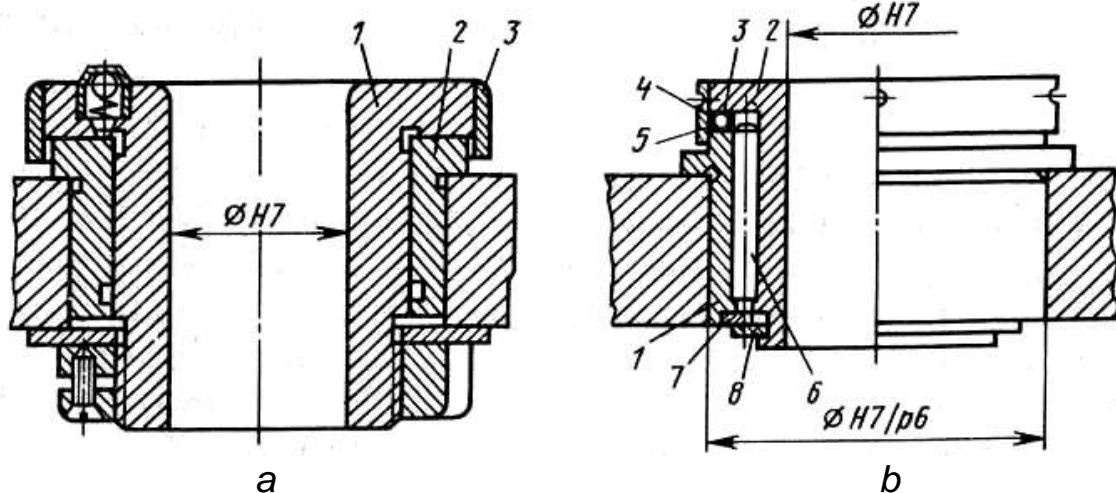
Guide rotating bushings mounted on a slide bearing (a) and frictionless bearing (b)
